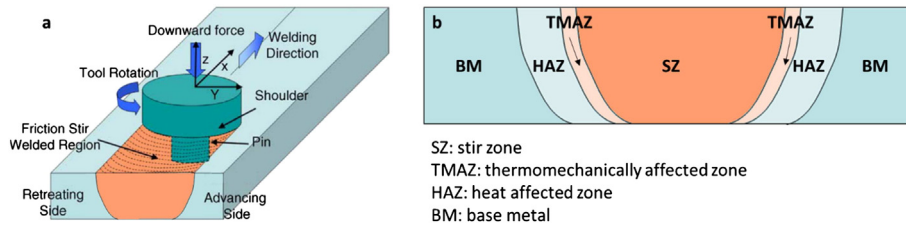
Schematic drawing of friction stir welding (inspired from [5]) (a) and schematic of a cross-section macrograph showing the different zones of the weld (b).
